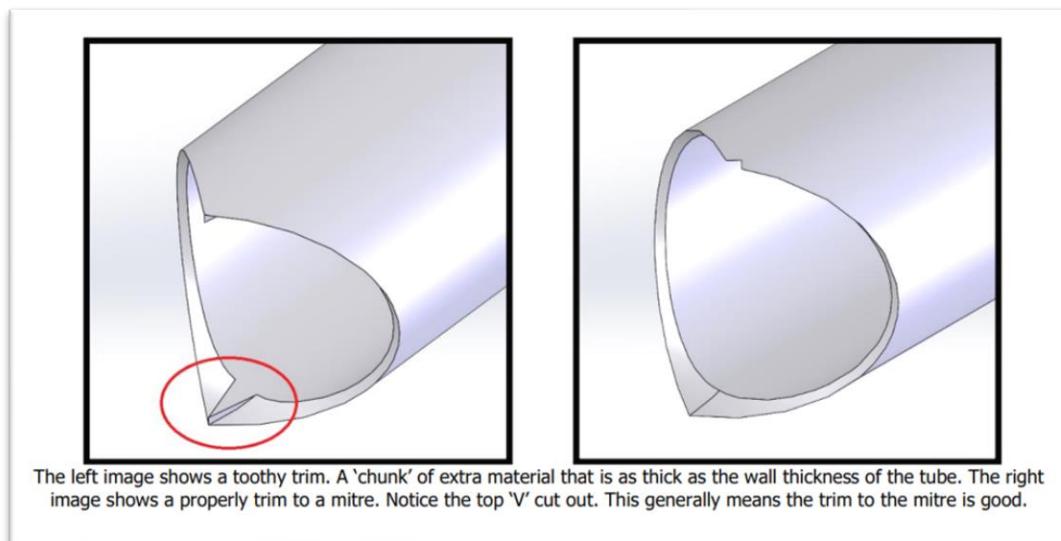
Demonstration of toothy notching (VR3 Engineering, 2023)
